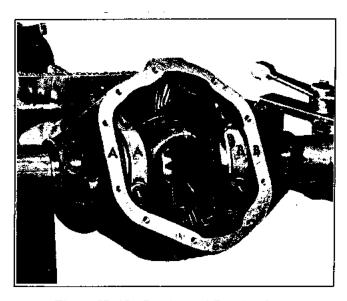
B-15. Carrier and Bearing Cap Matching Marks
